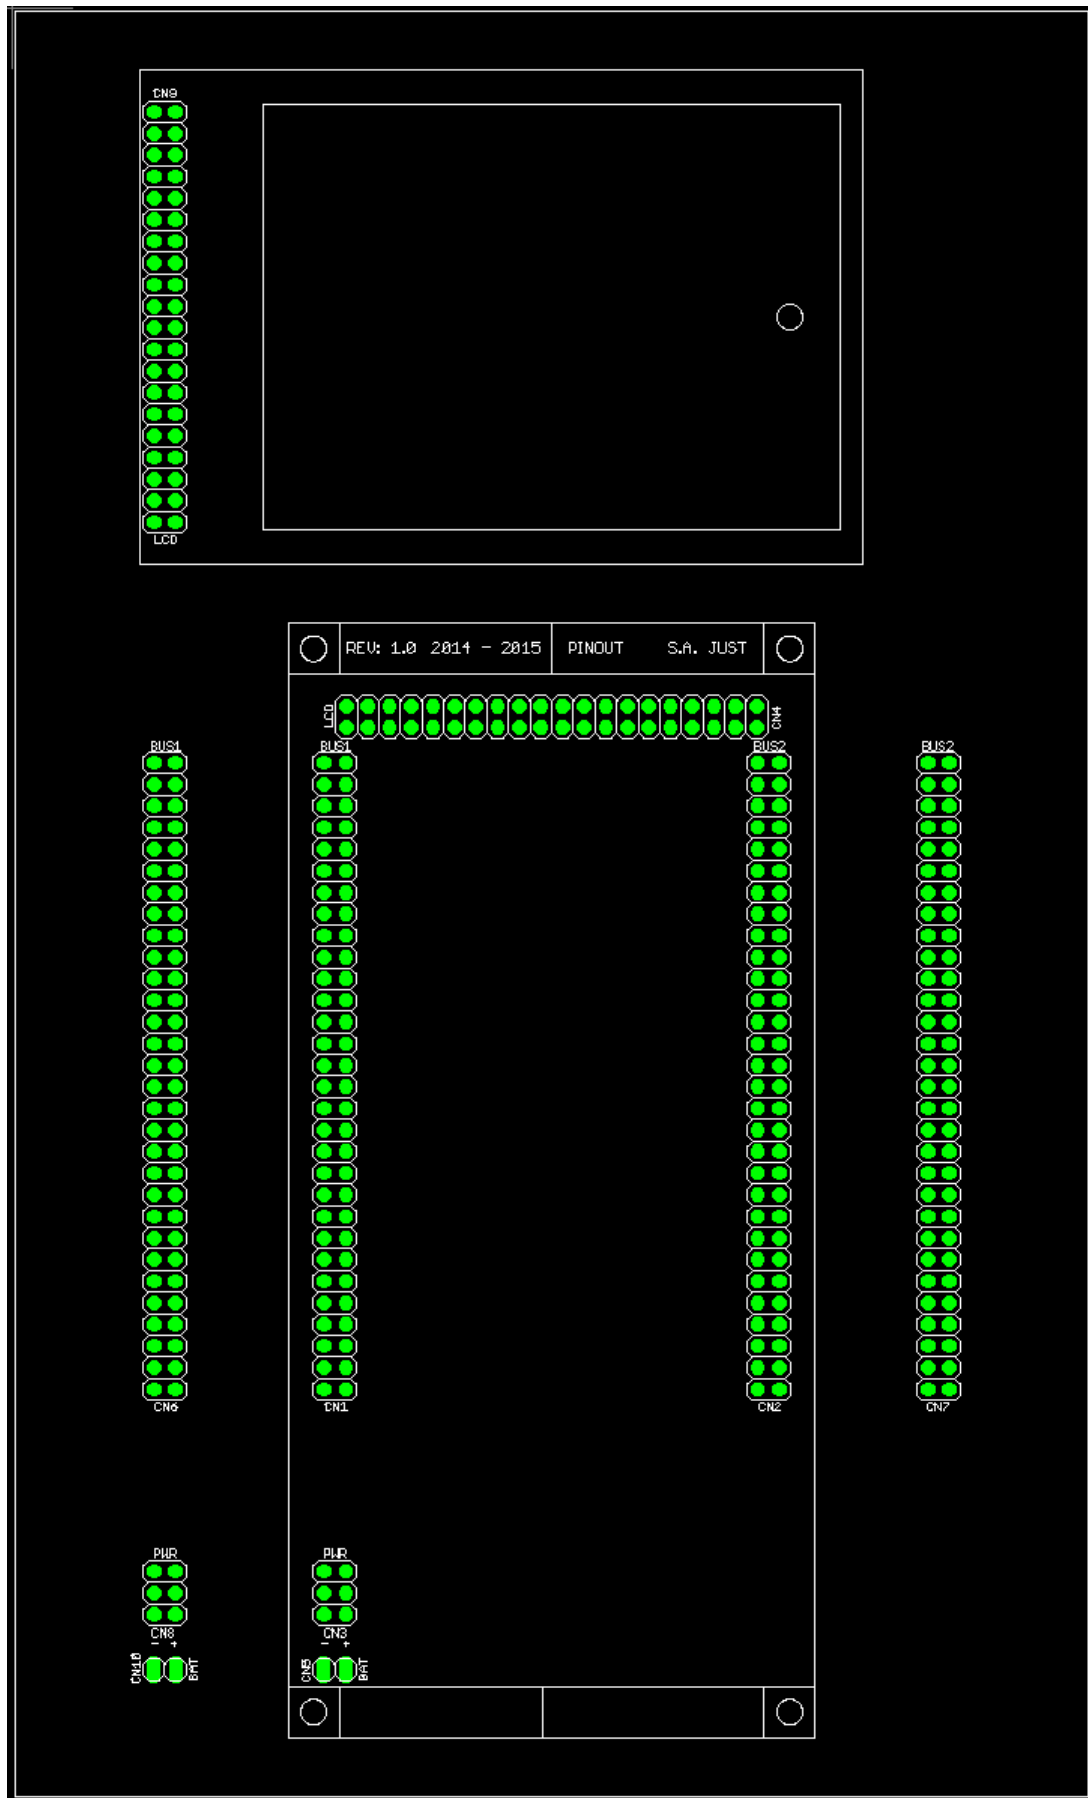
DAD AV board bottom layer designed using EAGLE
